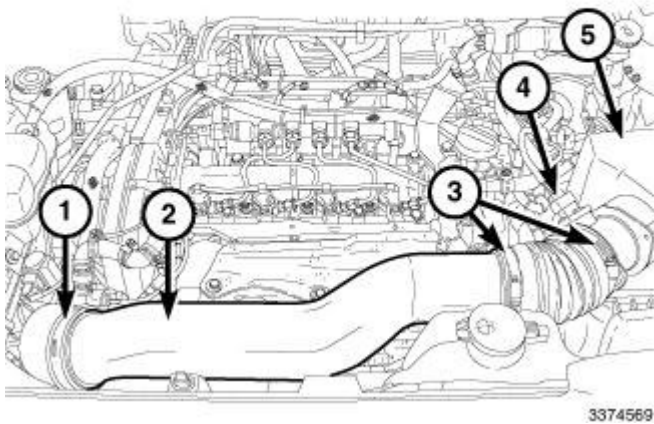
Upper Clean Air To Turbocharger Tube & Air Cleaner Assembly
